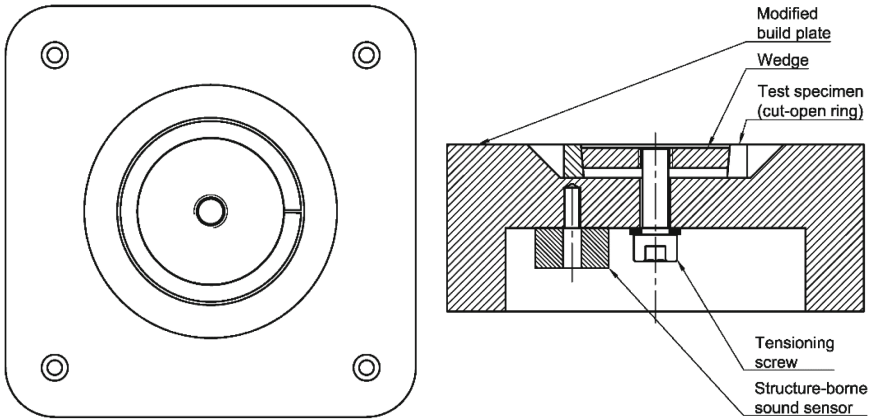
Top view (left) and cross-sectional view (right) of the concept for the device for setting a mechanical load
